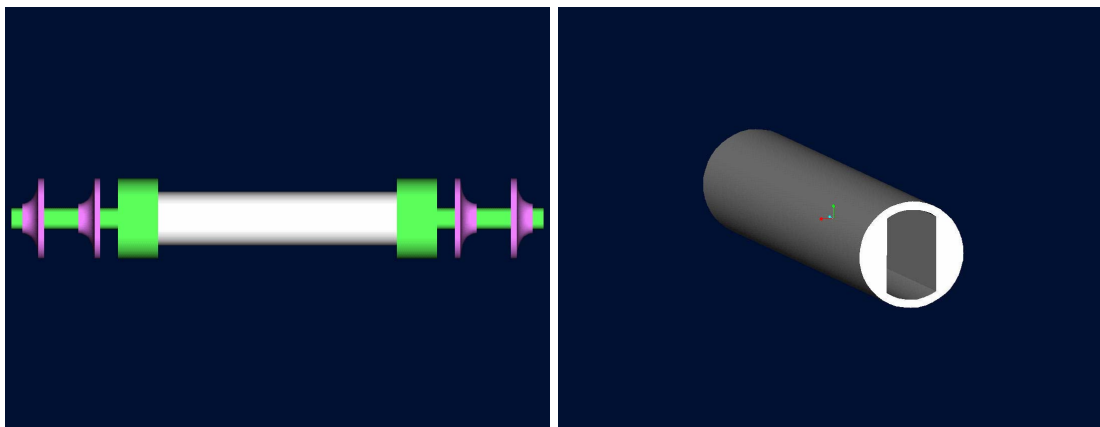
Complete assembly (concept figure) Figure 5. Rotor of the motor
